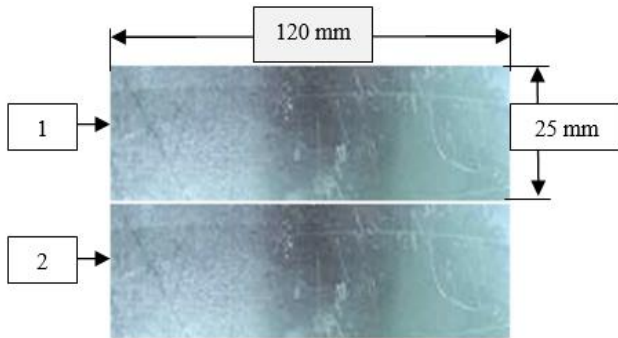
Two pieces of AA 6061 and dimensions for the UFSW
